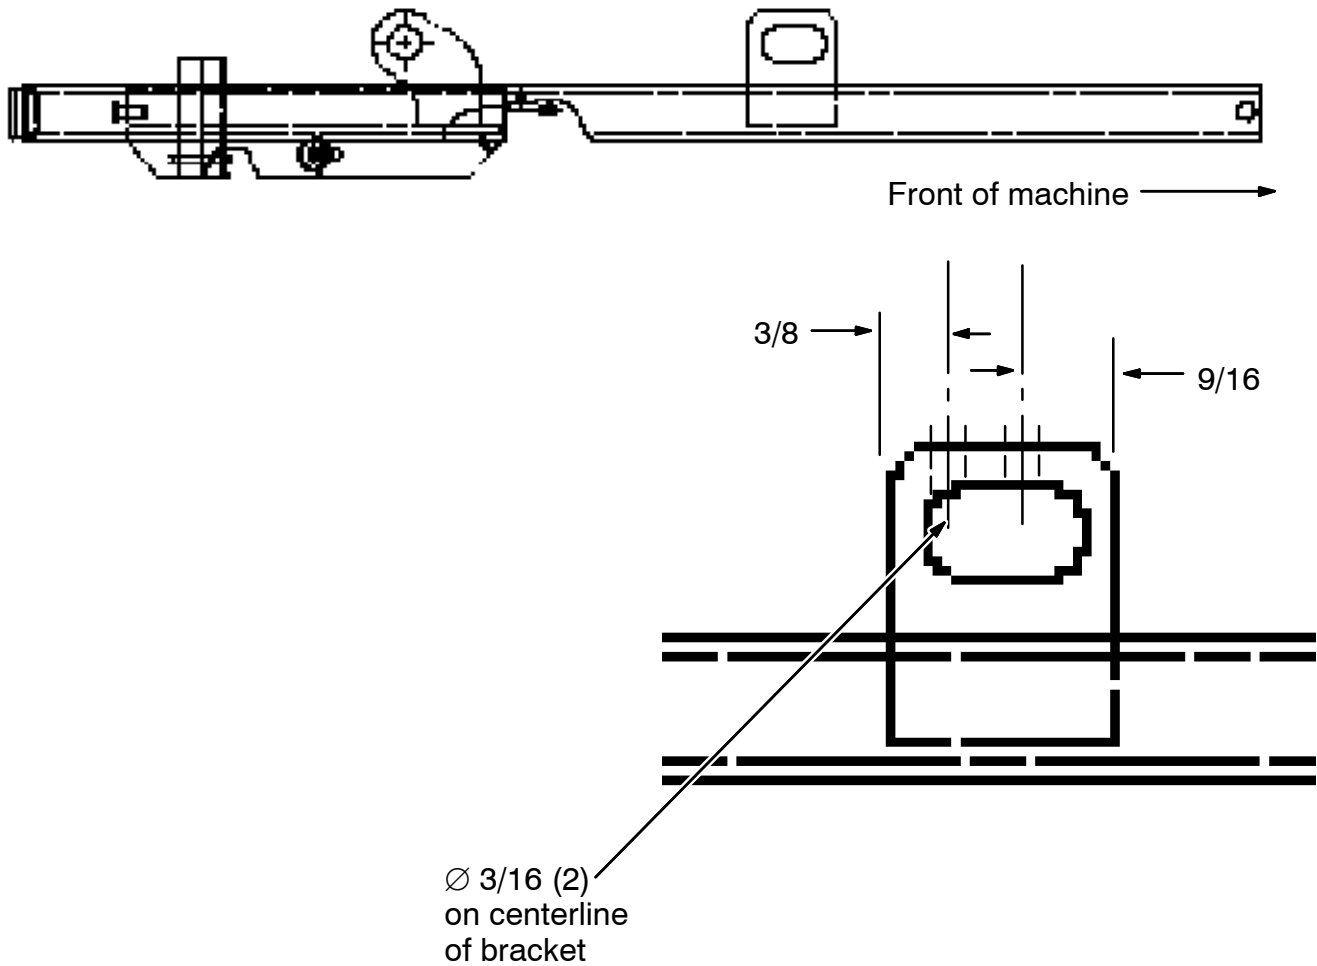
Side Squeegee Kit Installation (Disk Machines Only)
